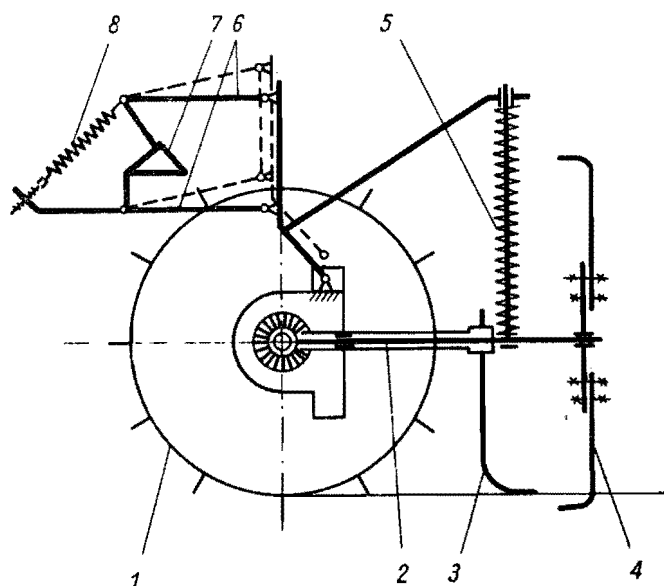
Example of a rotary thinning device's section: 1—driving wheel; 2—driving shaft; 3—adjustable blade; 4—blades; 5—thrust spring; 6—four-bar linkage; 7—frame; 8—returning spring.
